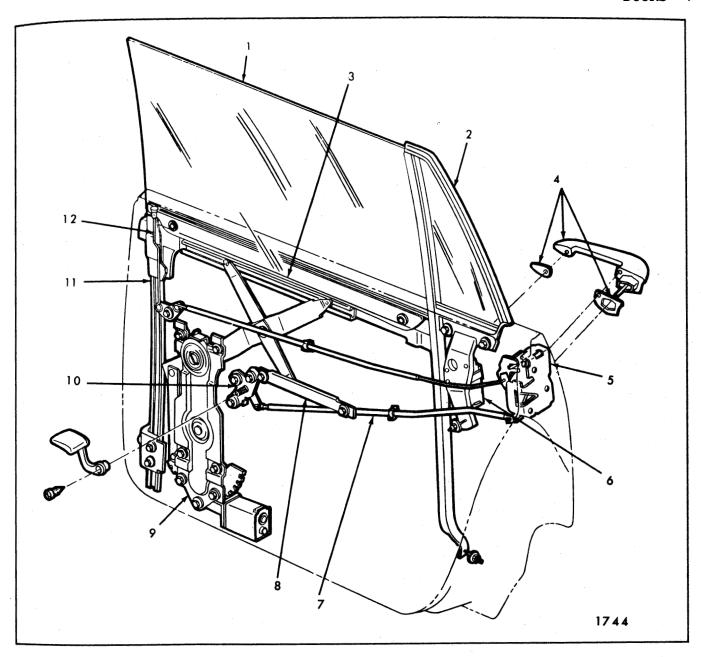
Rear Door Hardware - 68069-68169 Styles
